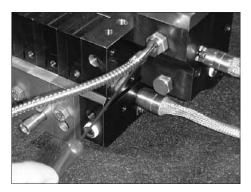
Installing a miniature pressure transducer (filter block location shown)
